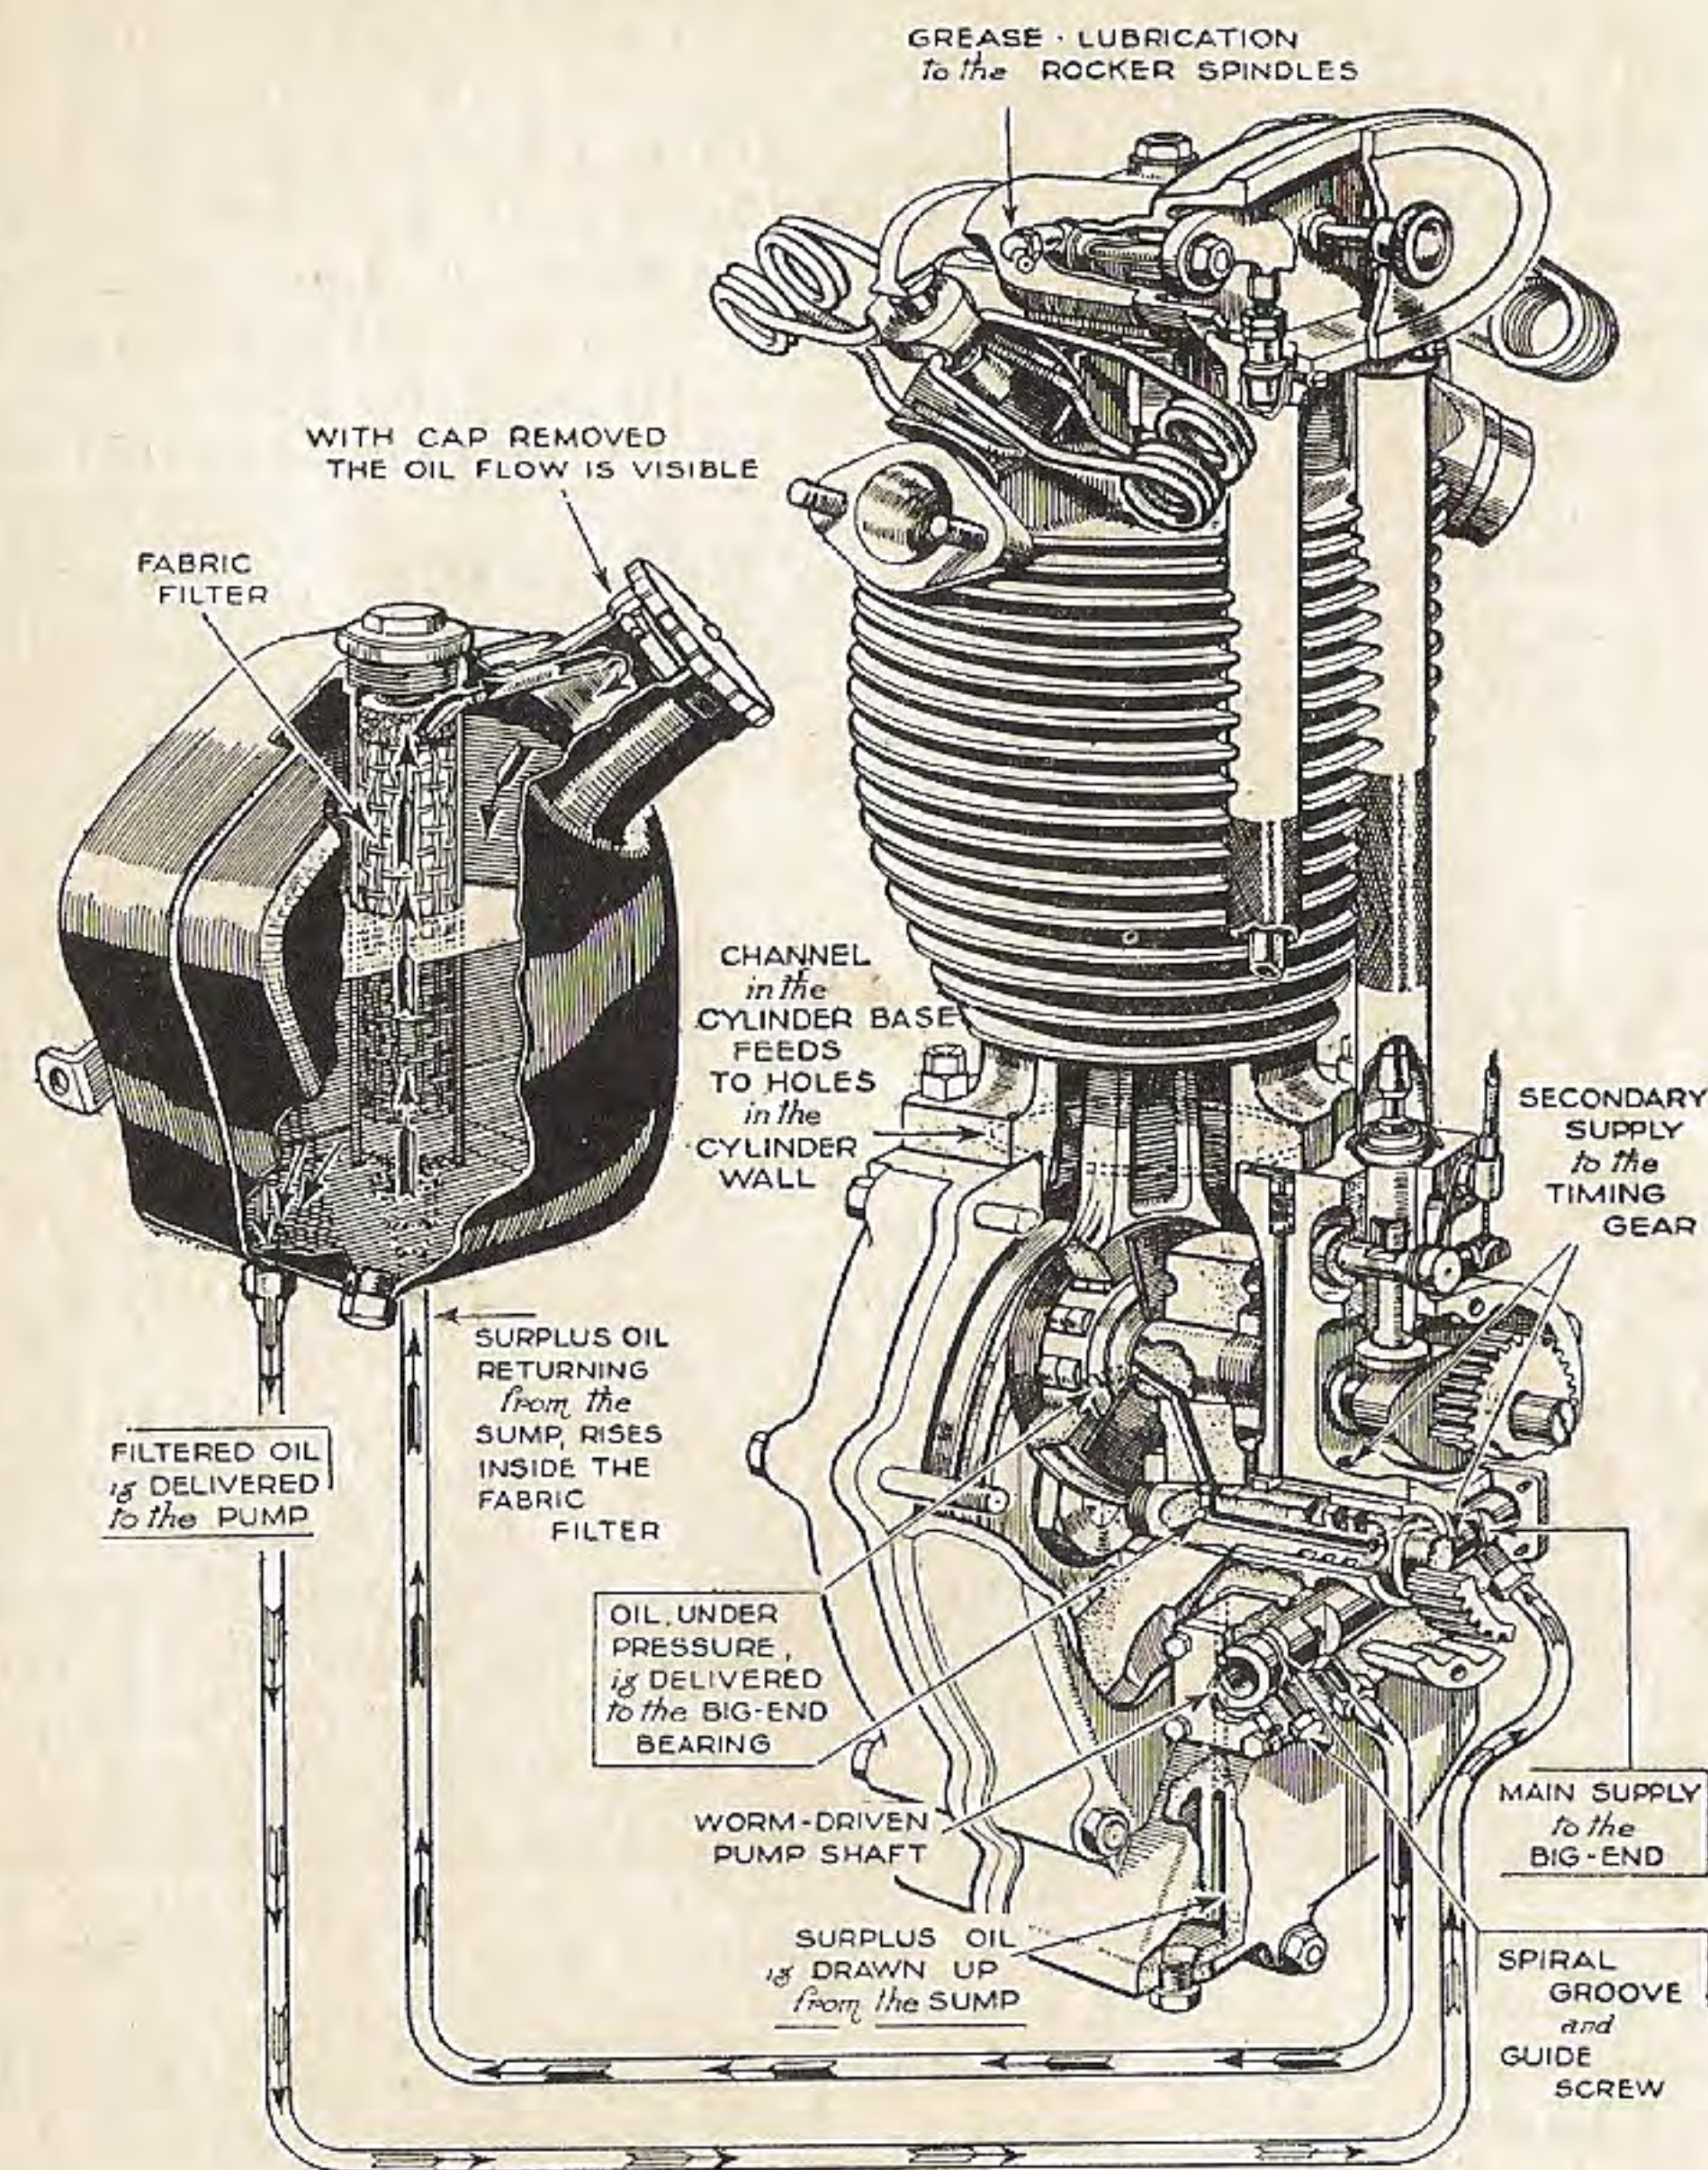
HOW THE "CLUBMAN" ENGINE IS LUBRICATED
